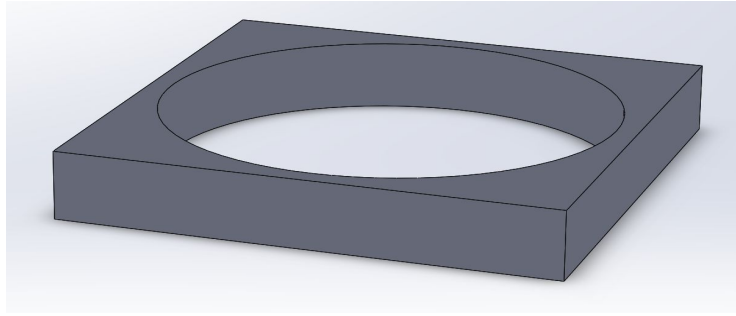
Four layers of prepreg carbon fiber will be laid up on the inside surface of the centerpiece of the mold.
